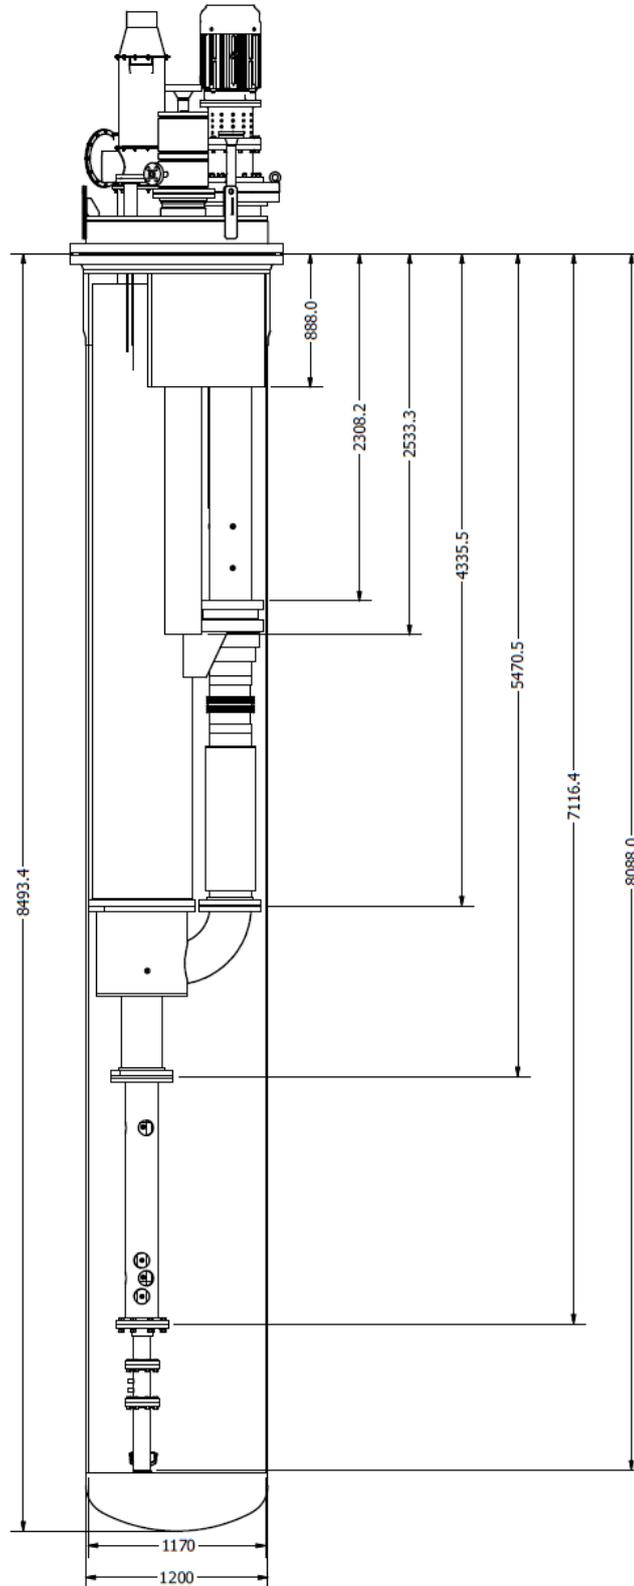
Main pool dimensions and positions of the components inside the vessel
